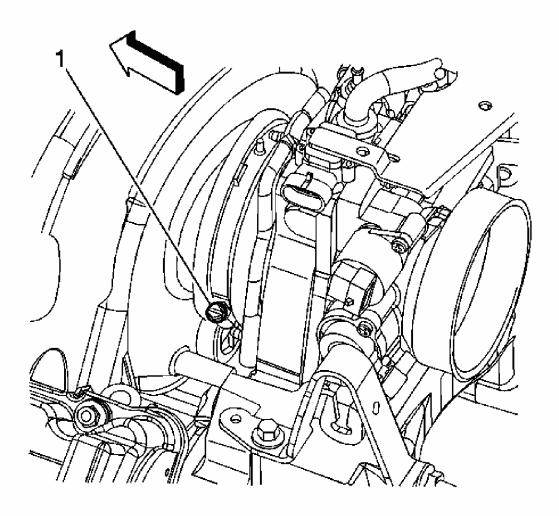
Locating Plenum Duct Clamp Screw Courtesy of GENERAL MOTORS CORP.
